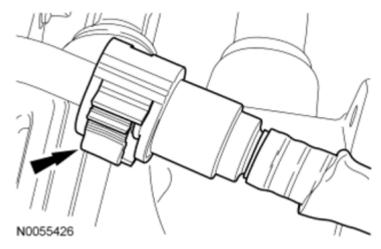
Locating Fuel Supply Tube Courtesy of FORD MOTOR CO.
